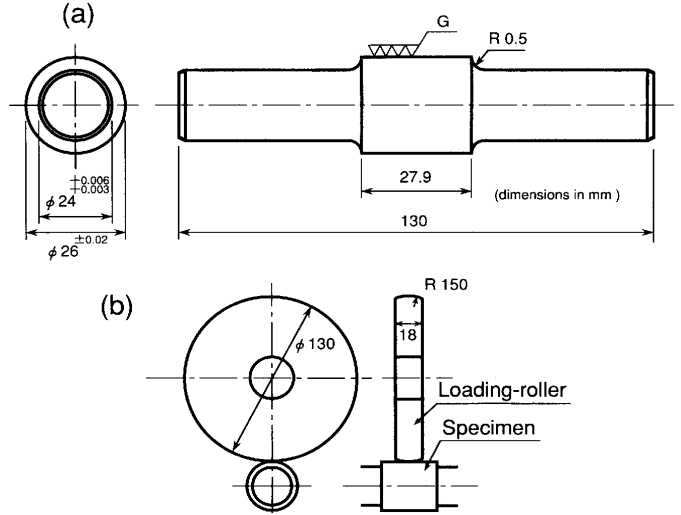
Roller-Pitting fatigue test condition: (a) shape and dimension of specimen, (b) specimen and loading-roller arrangements.
